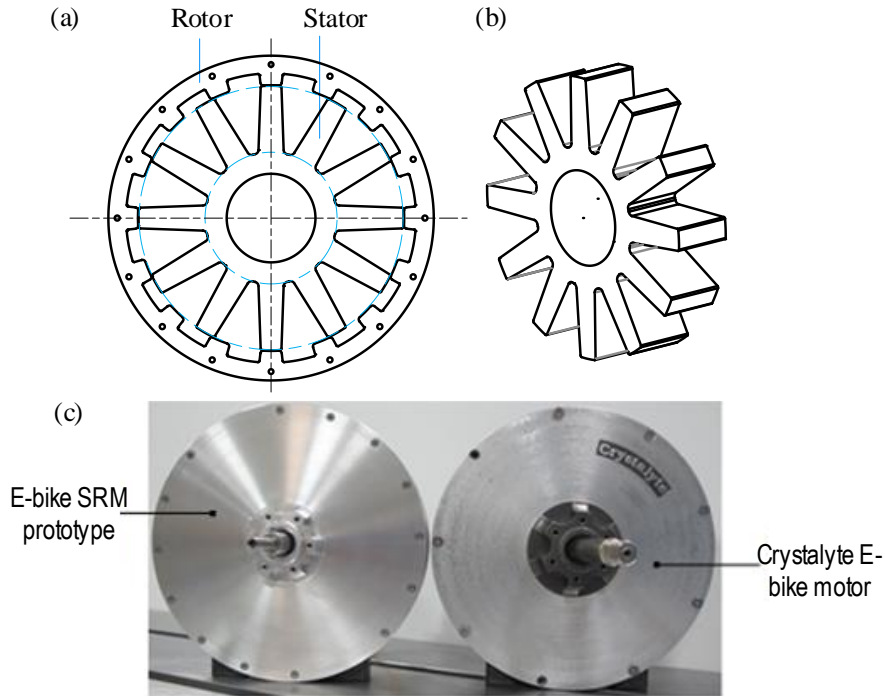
Geometries of the 12/16 external-rotor SRM: (a) CAD drawing of the assembly, (b) 3D drawing of the stator, (c) prototype of the E-bike motor.
